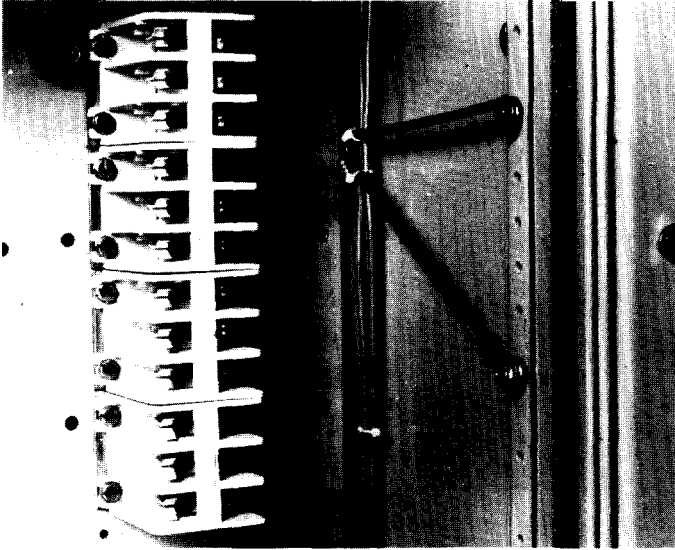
Easily accessible lay-in wiring in vertical wiring trough.
